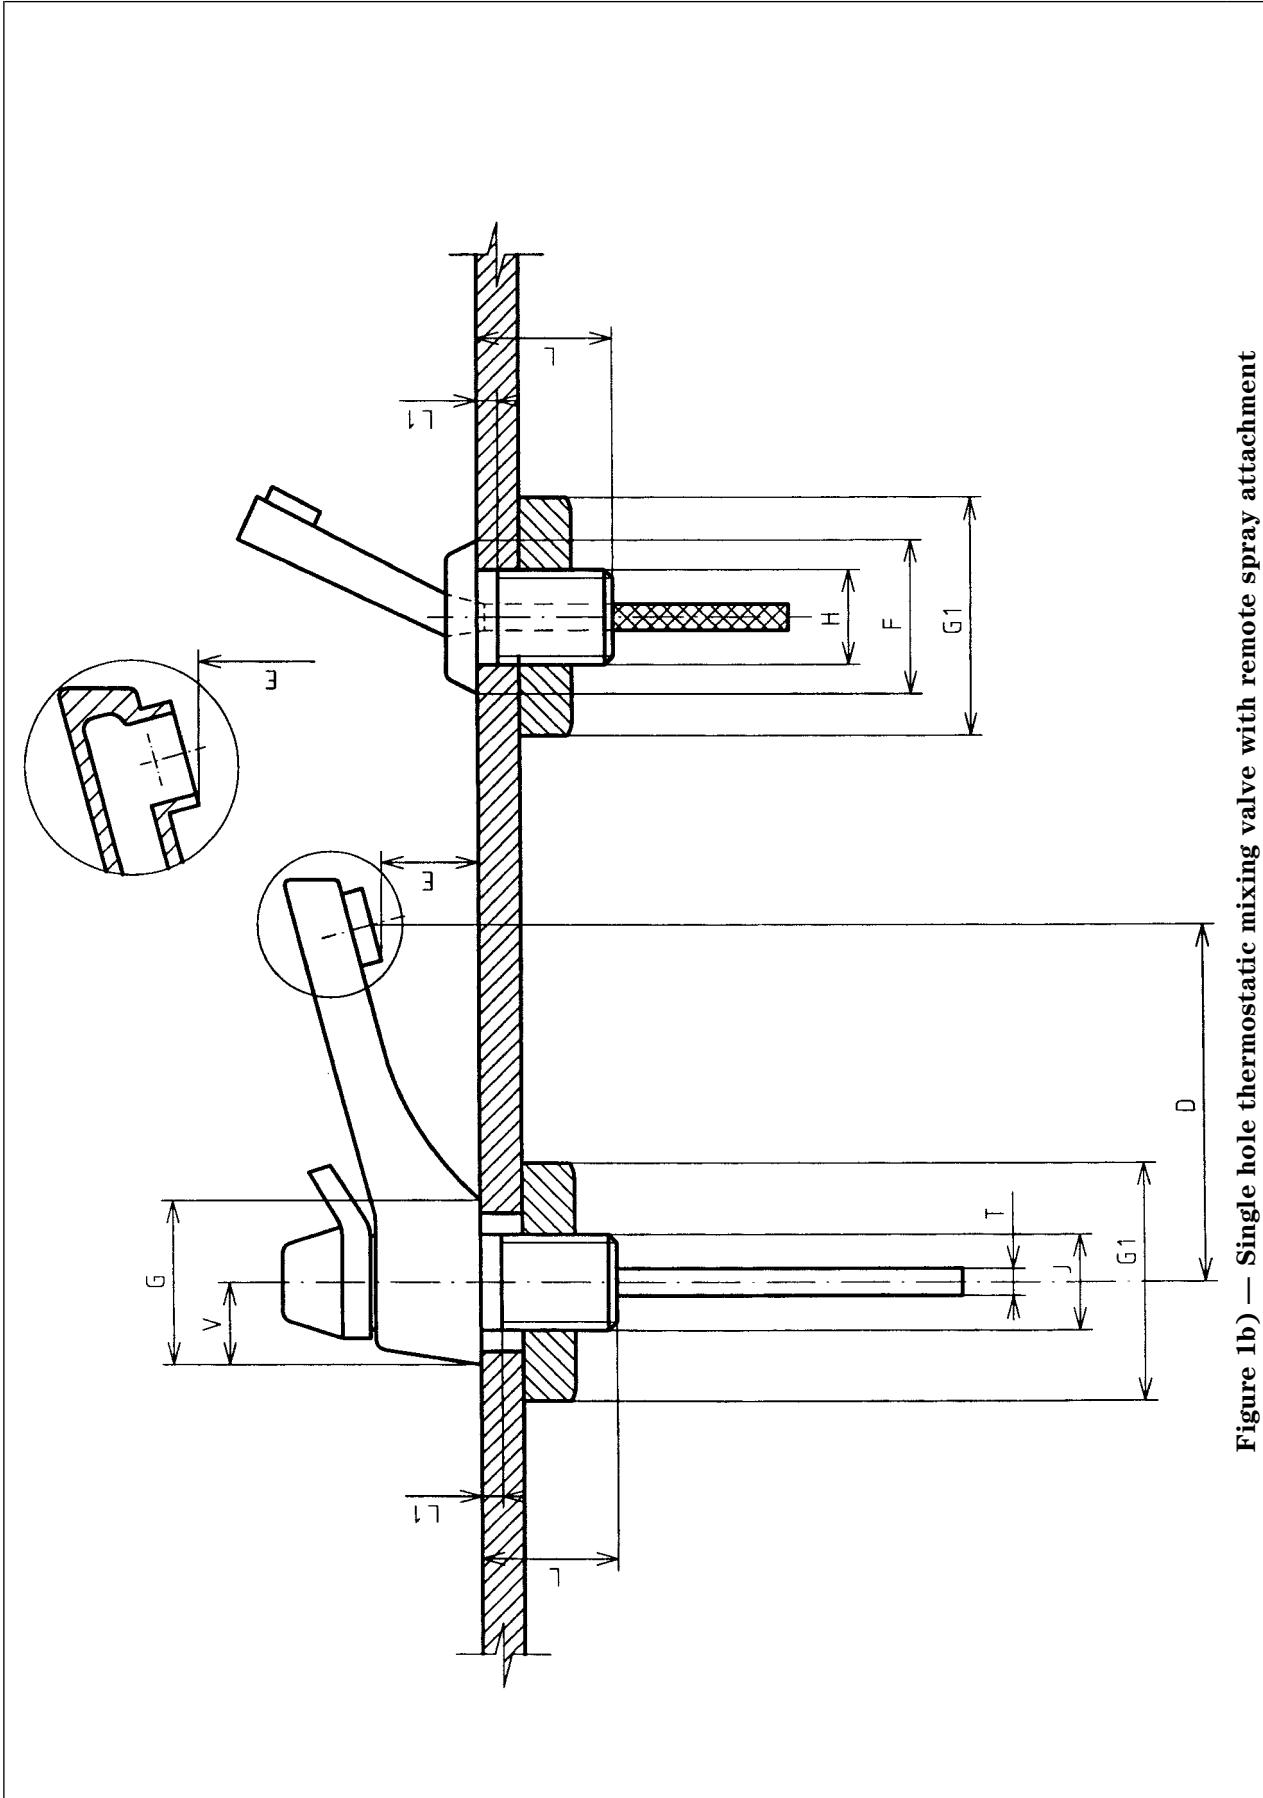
Single hole thermostatic mixing valve with remote spray attachment
